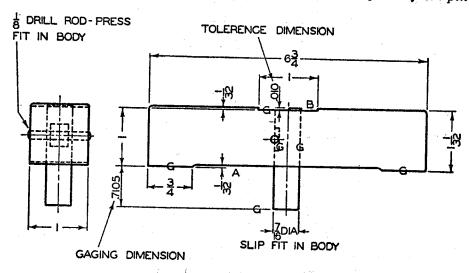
Recommended design and method of dimensioning short flush-pin gage.
